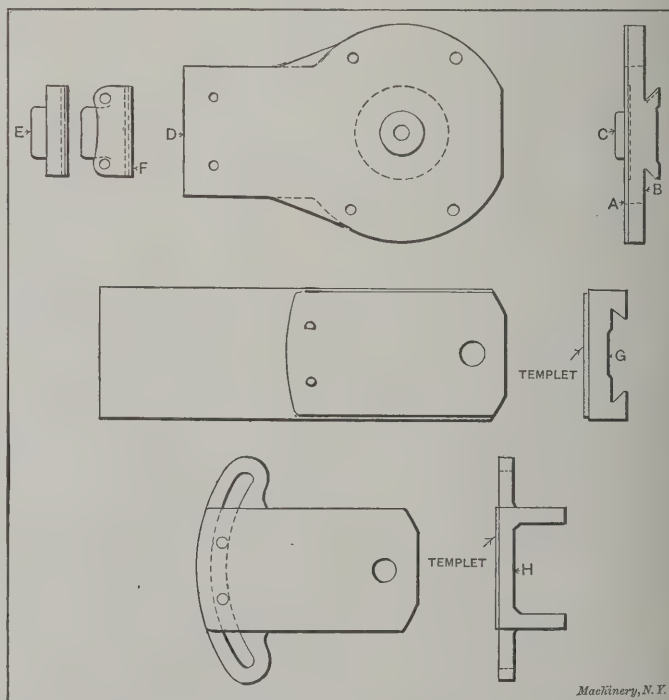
Sheet Iron Templets for Laying out Planer Crossrail Members
